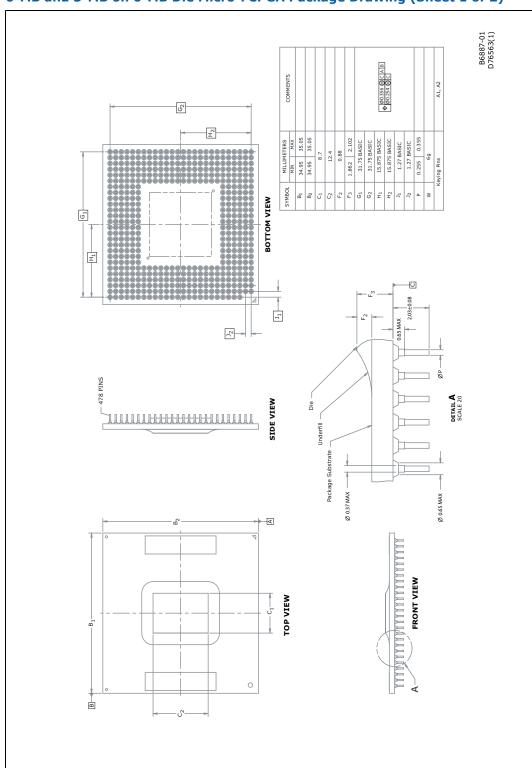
3-MB die Micro-FCPGA Processor Package Drawing (Sheet 1 of 2)
